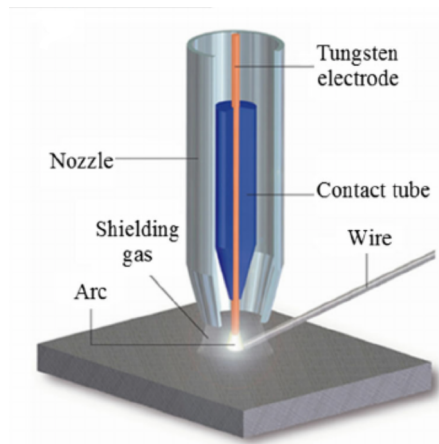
Illustration of gas tungsten arc welding. Source: [13]
